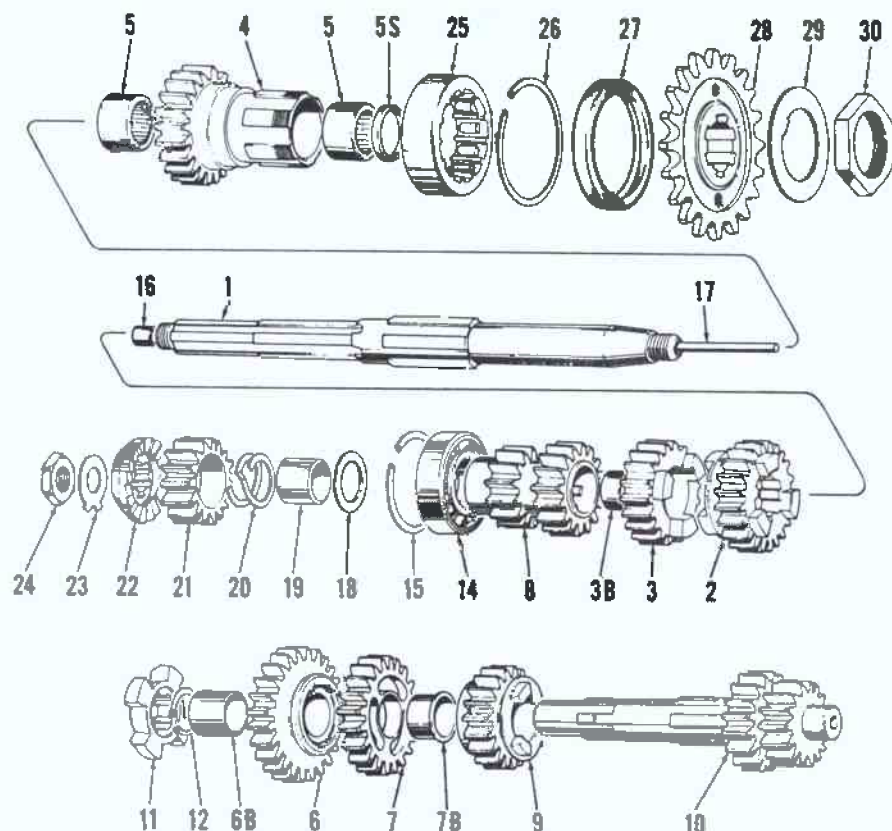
Exploded view of five speed transmission gears and associated parts.
